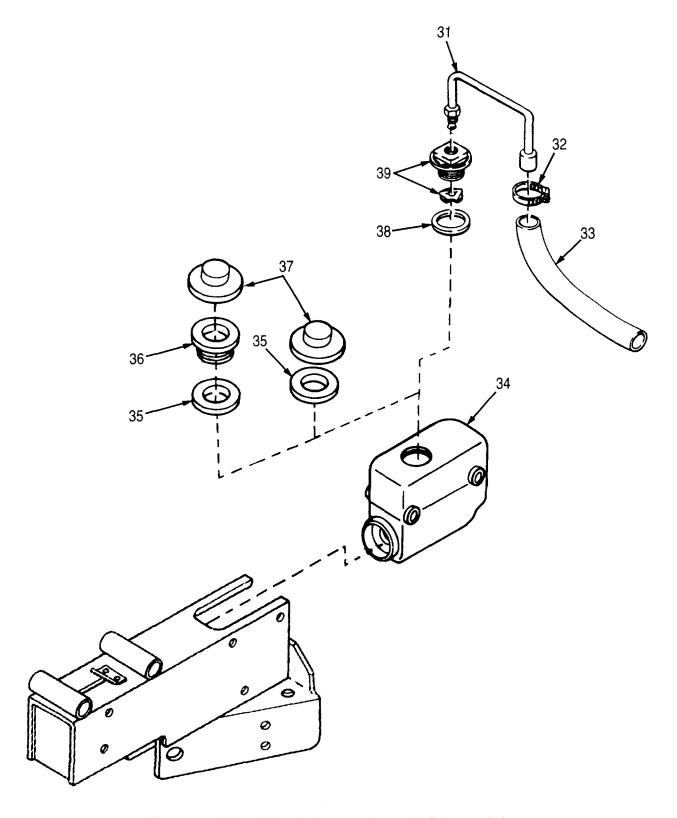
Hydraulic Brake Actuator Assembly (sheet 2 of 2)
